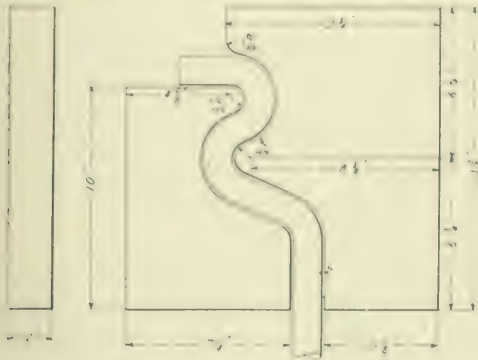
Dies for Bending Forging for Strap Bolt Before Forging.
